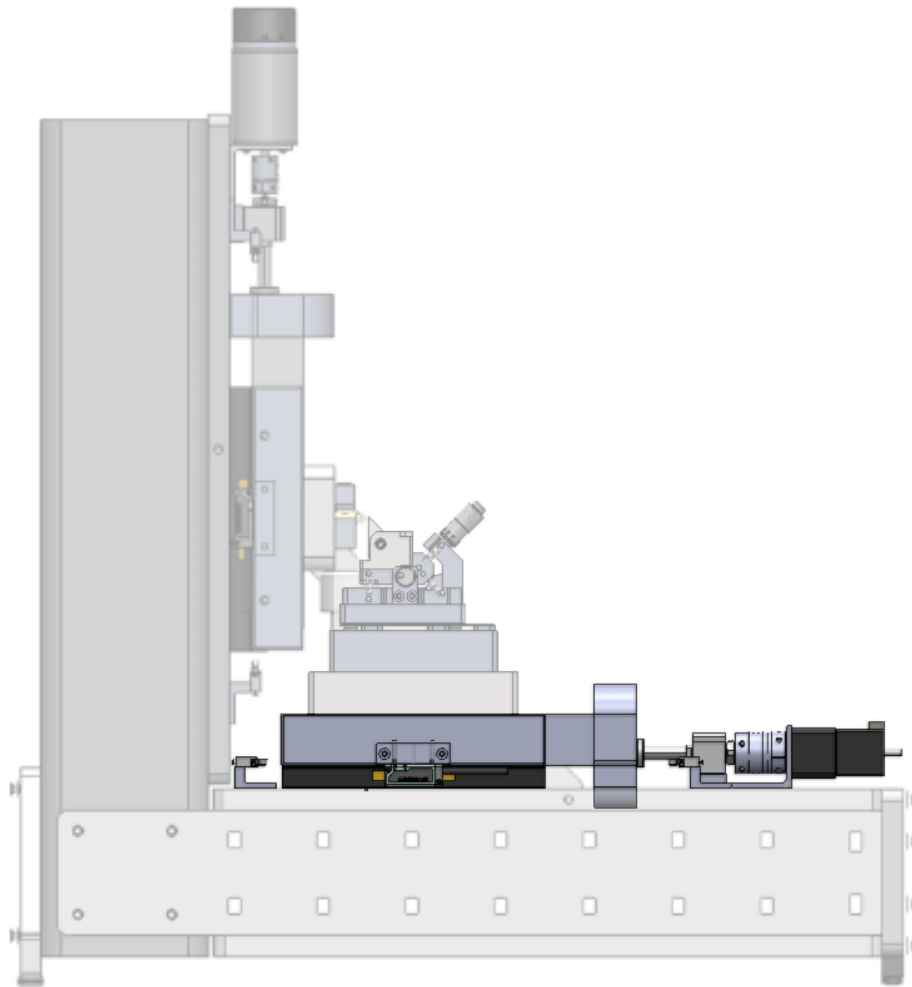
The feed stage subassembly, highlighted within the full assembly
